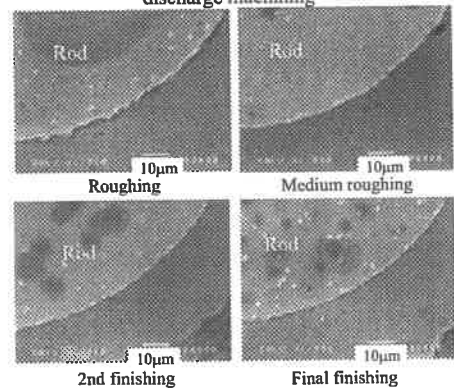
Damaged layer of WC rod after discharge machining
